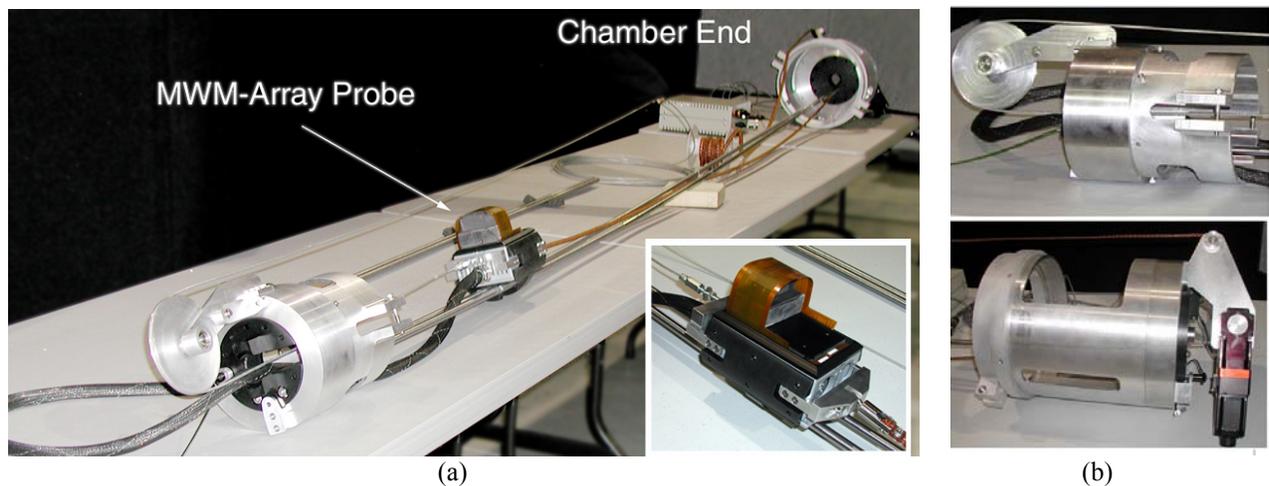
(a) Inspection fixture with an inset photograph of the MWM-Array probe; (b) close-up photographs of the muzzle end (left) and breach end (right) of inspection fixture.
